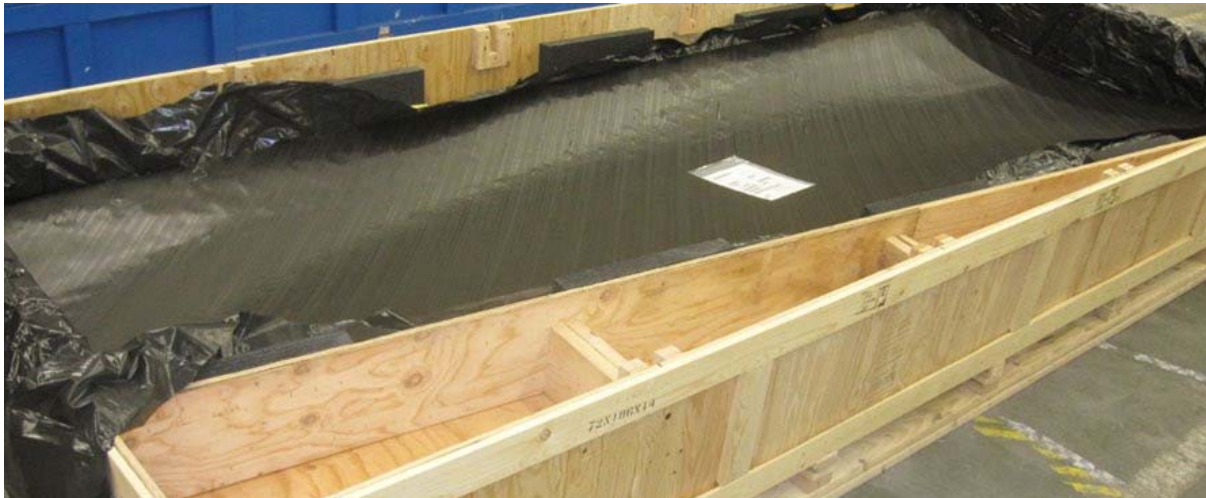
Picture of completed laser assisted fiber placement lay-up of the large scale component preform
